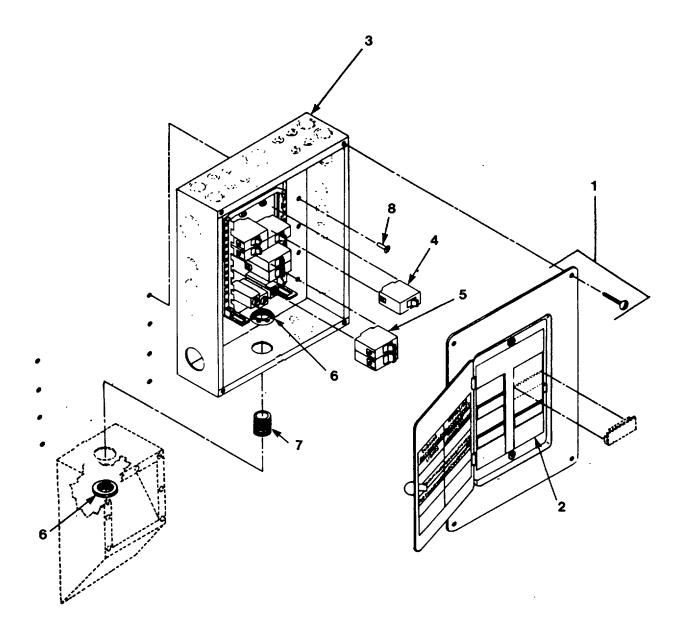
Main Power Receptacle Assembly (Sheet 2 of 2)
